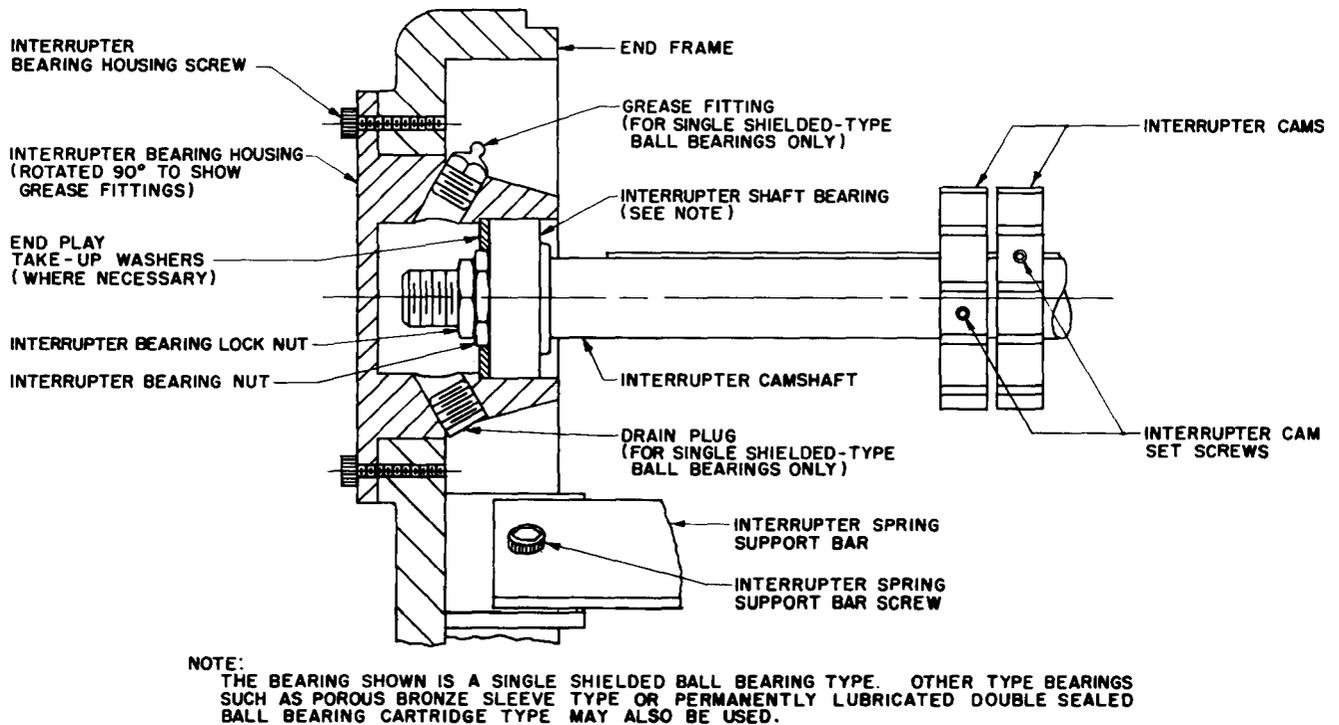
Tech Systems Company (formerly Electric Specialty Company) Sectional View of Interrupter Shaft Support—Ball Bearing Type
